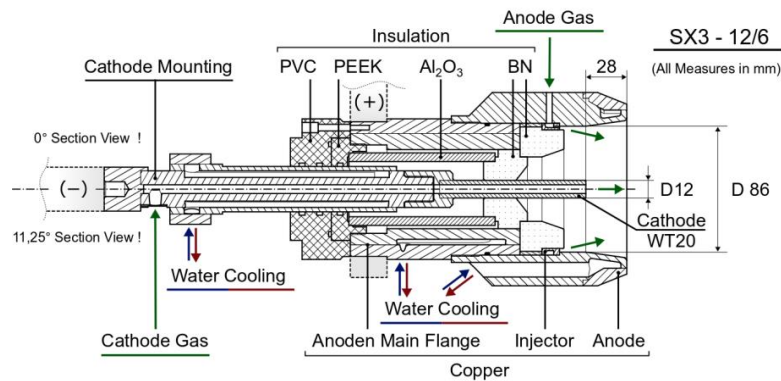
Sectional view of SX3 thruster with Ø 12/6 mm WT20 single channel hollow cathode.
